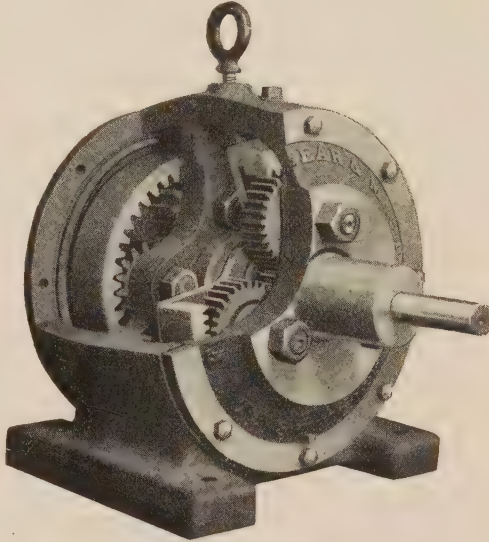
Internal Mechanism of INL Spur Gear Reducer.
